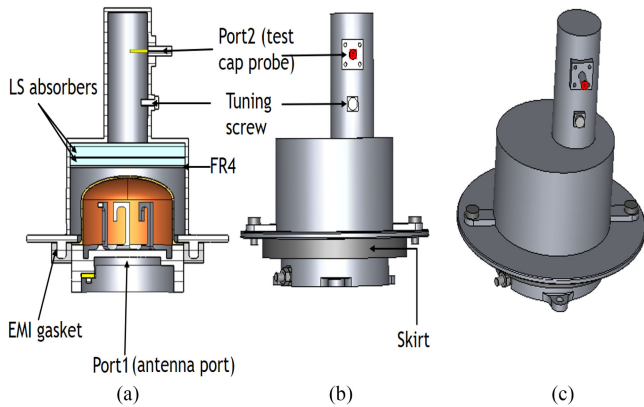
(a) Cut-out view of the TX test cap with the antenna. (b) Front view of TX test cap showing the test cap port and tuning screw positions. (c) Perspective view of the test cap assembly with the antenna.
